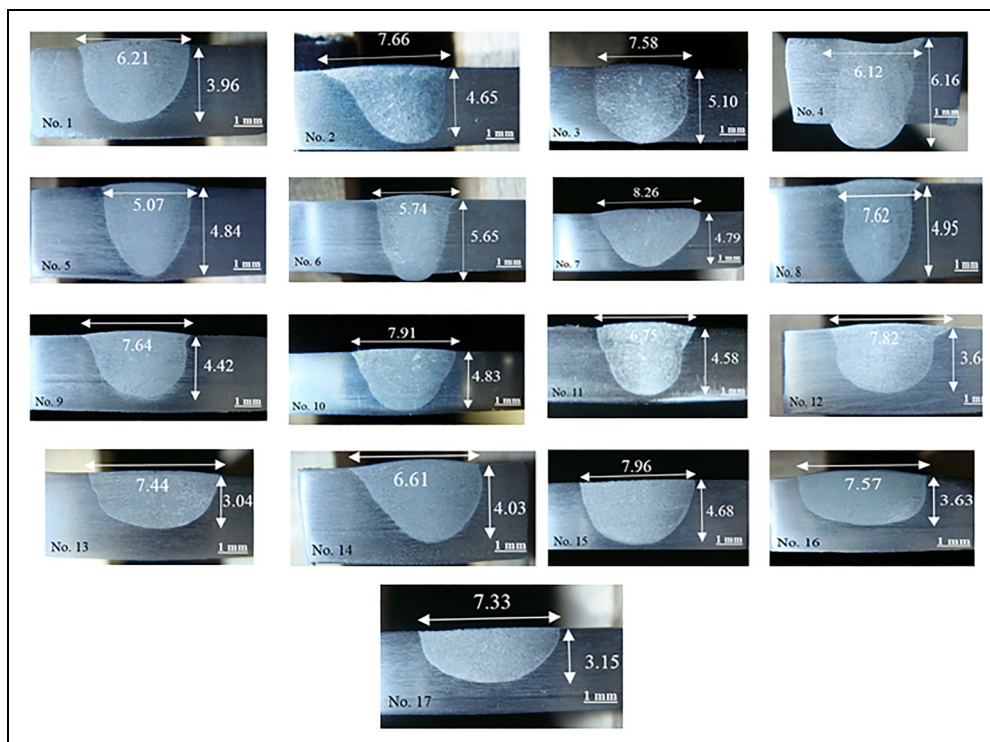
A-GTAW weld cross-sectional profile.
